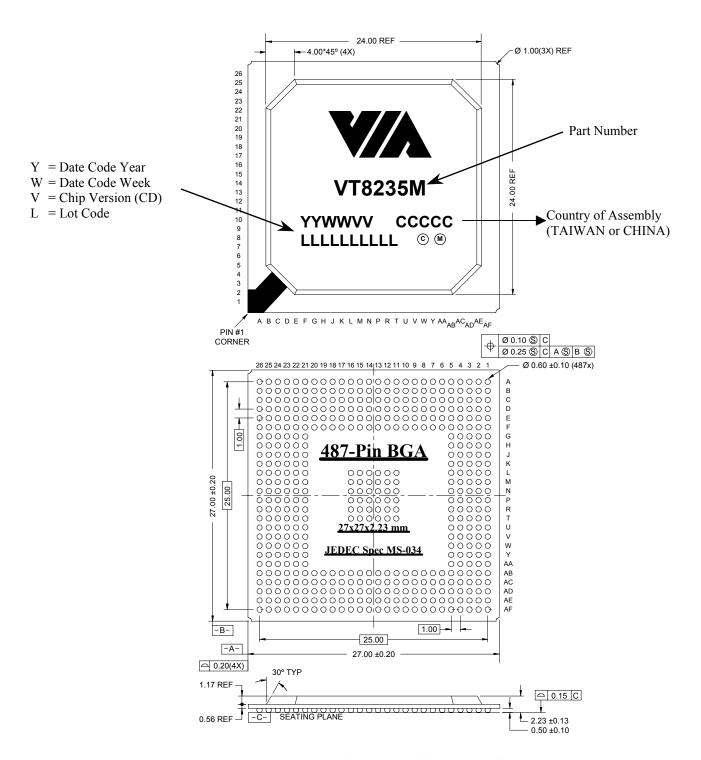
Mechanical Specifications – 487 Pin Ball Grid Array Package
